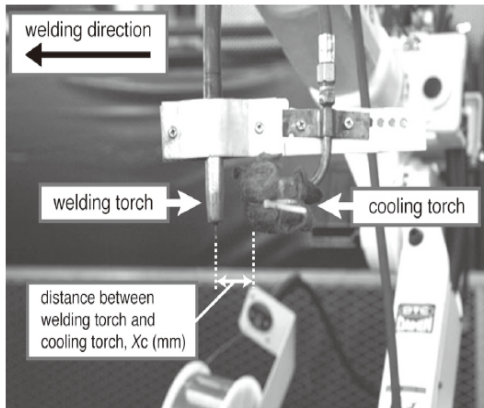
Heat sink welding with water cooling torch
